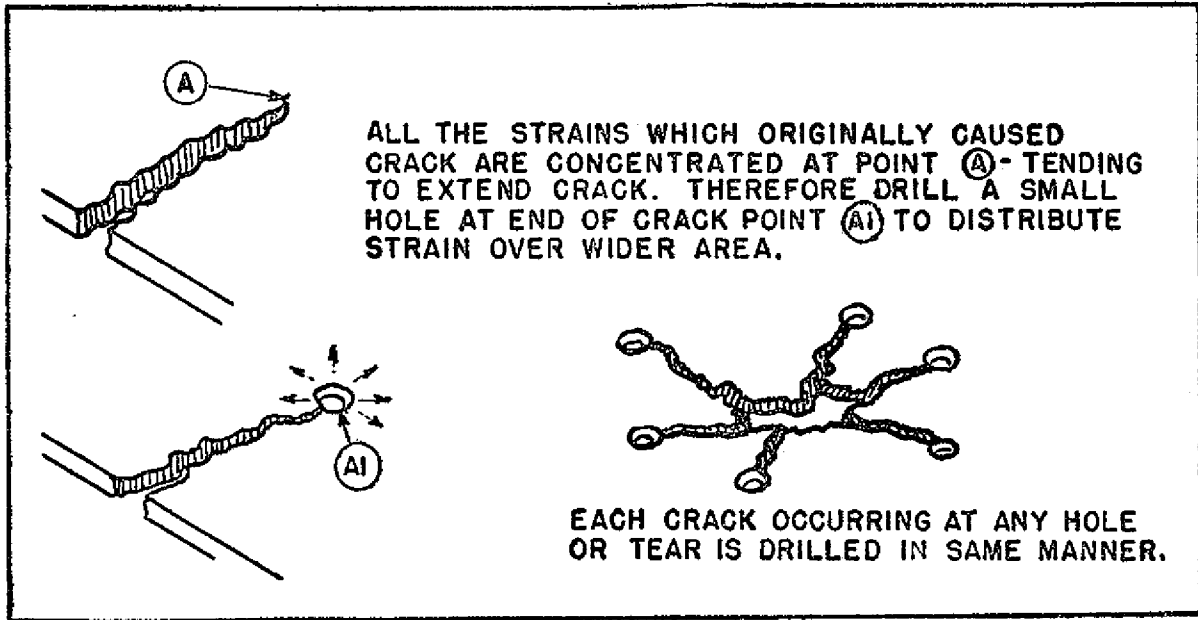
Stop-Drilling Cracks. Ref. CAM 18.20-9(e)
